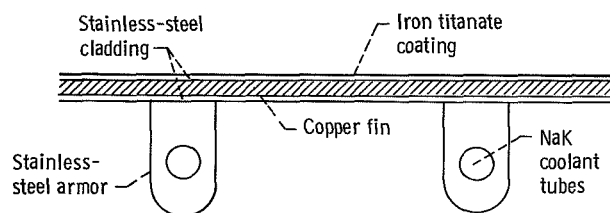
Schematic of conducting bumper fin-and-tube radiator.
